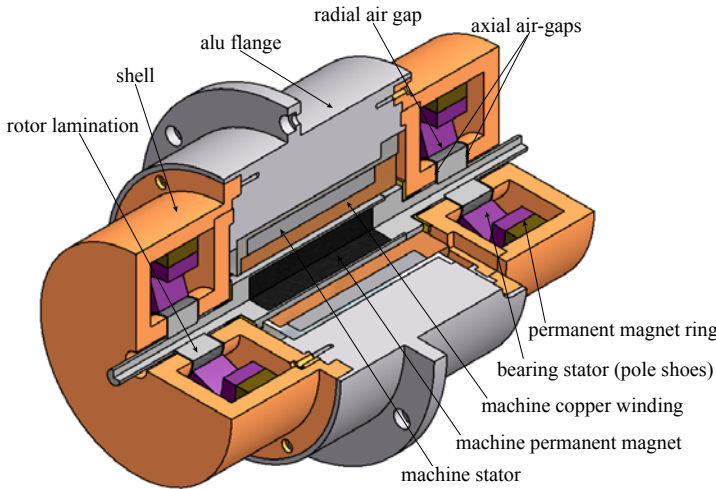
Cut away view of the 1 kW, 500,000 rpm system. Electrical drive and two bearing units mounted on an aluminum flange.
